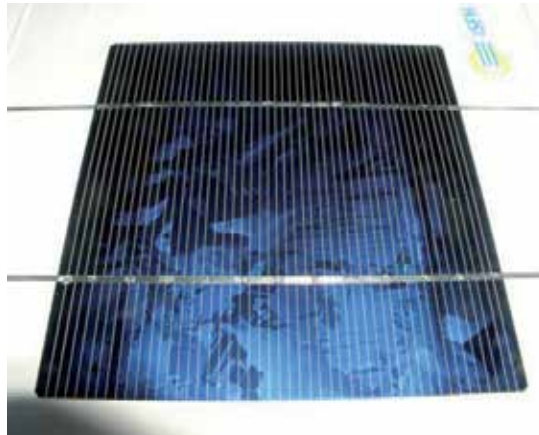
With In-Laminate Laser Soldering (ILLS) manufactured solar cell module. Adapted from [35].
